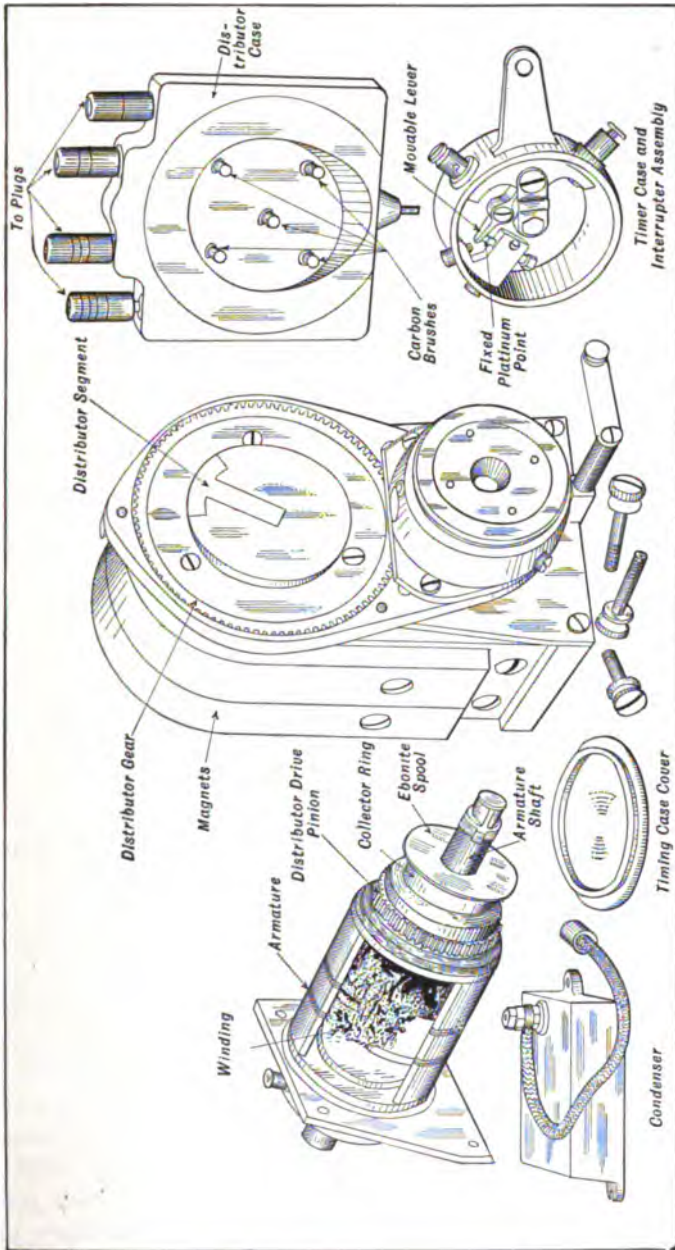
Partially dismantled four-cylinder magneto, showing important parts of current-producing and distributing elements.
